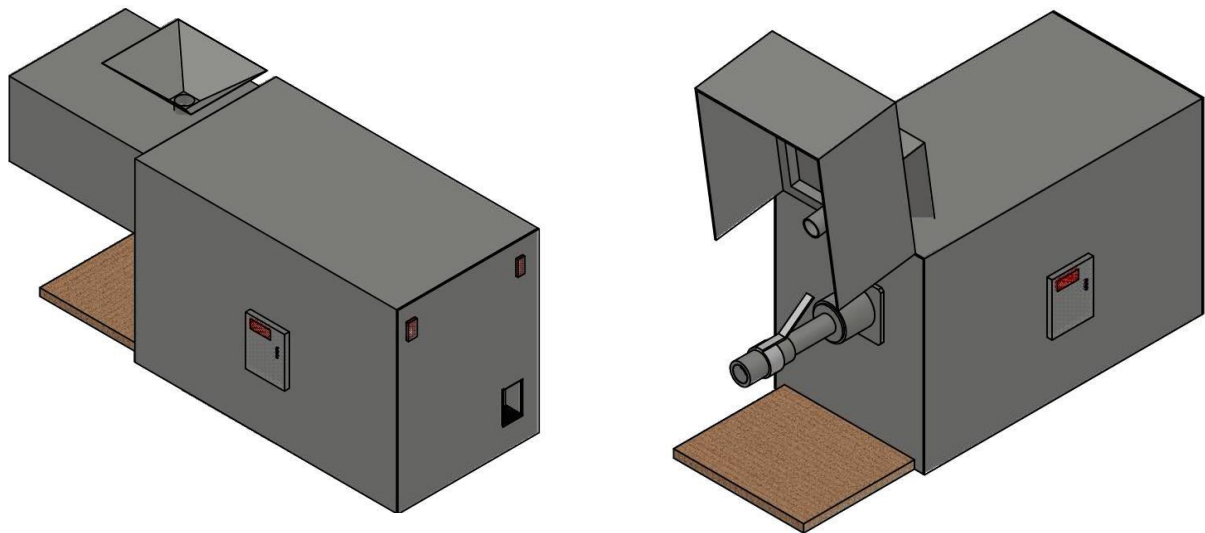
Isometric View of the Assembled Domestic Oil Press Machine
